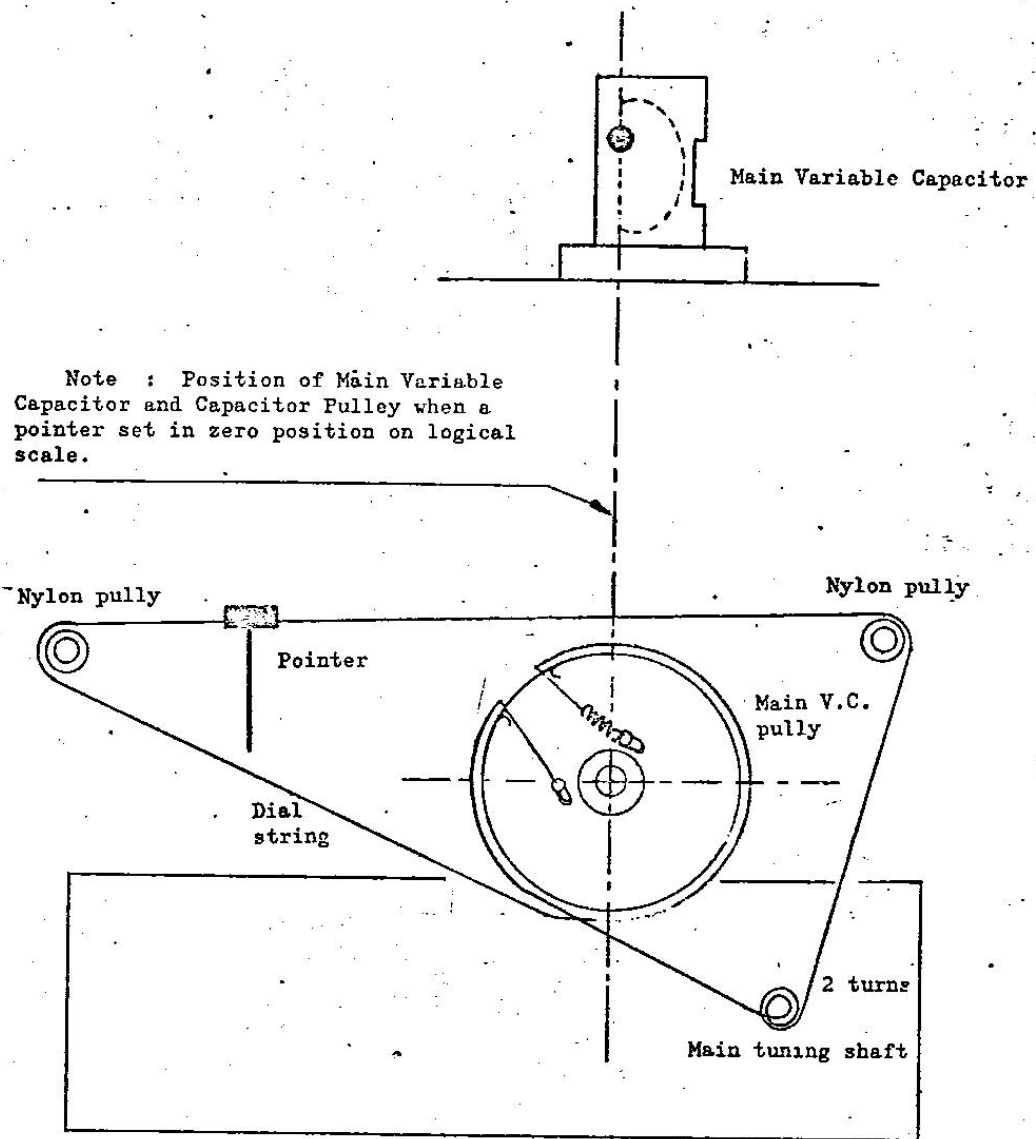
MAIN TUNING DIAL CORD ASSEMBLY
